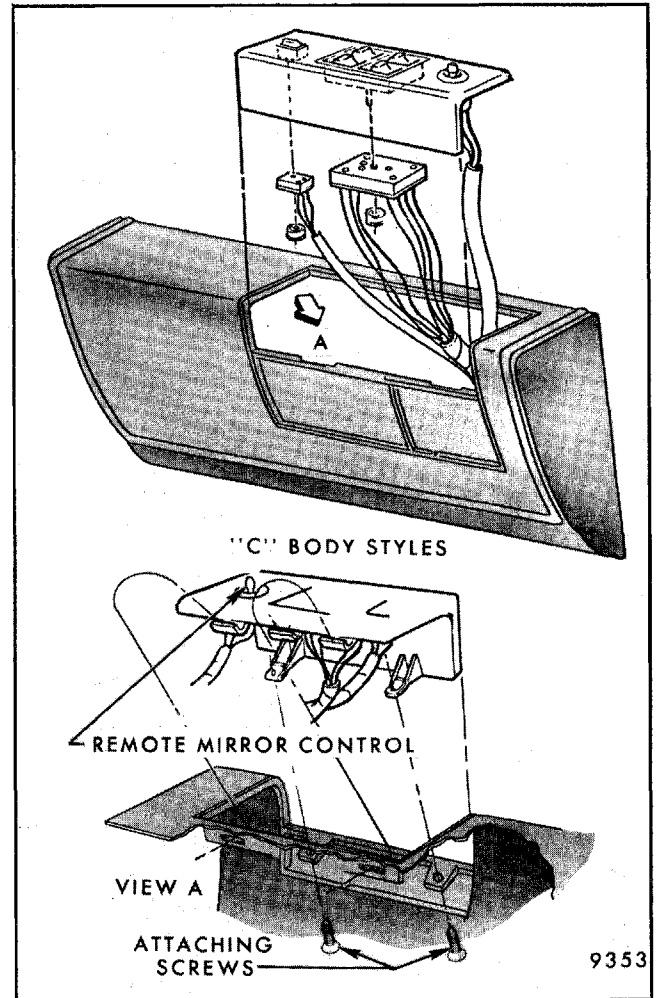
Door Armrest Switch Cover Plate and Remote Mirror Cable Attachment - "C" Styles
